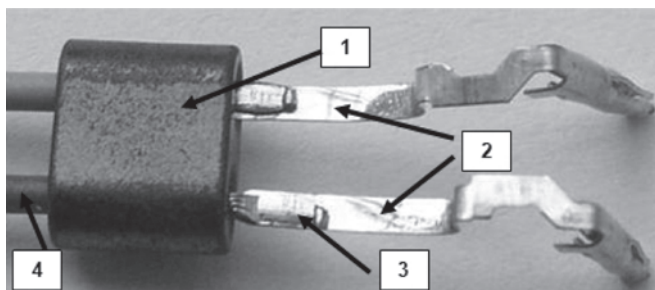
An airbag connector and their components: noise filtering ferrite (1), terminal (2), welded elementary joint (3), stranded wire (4)
